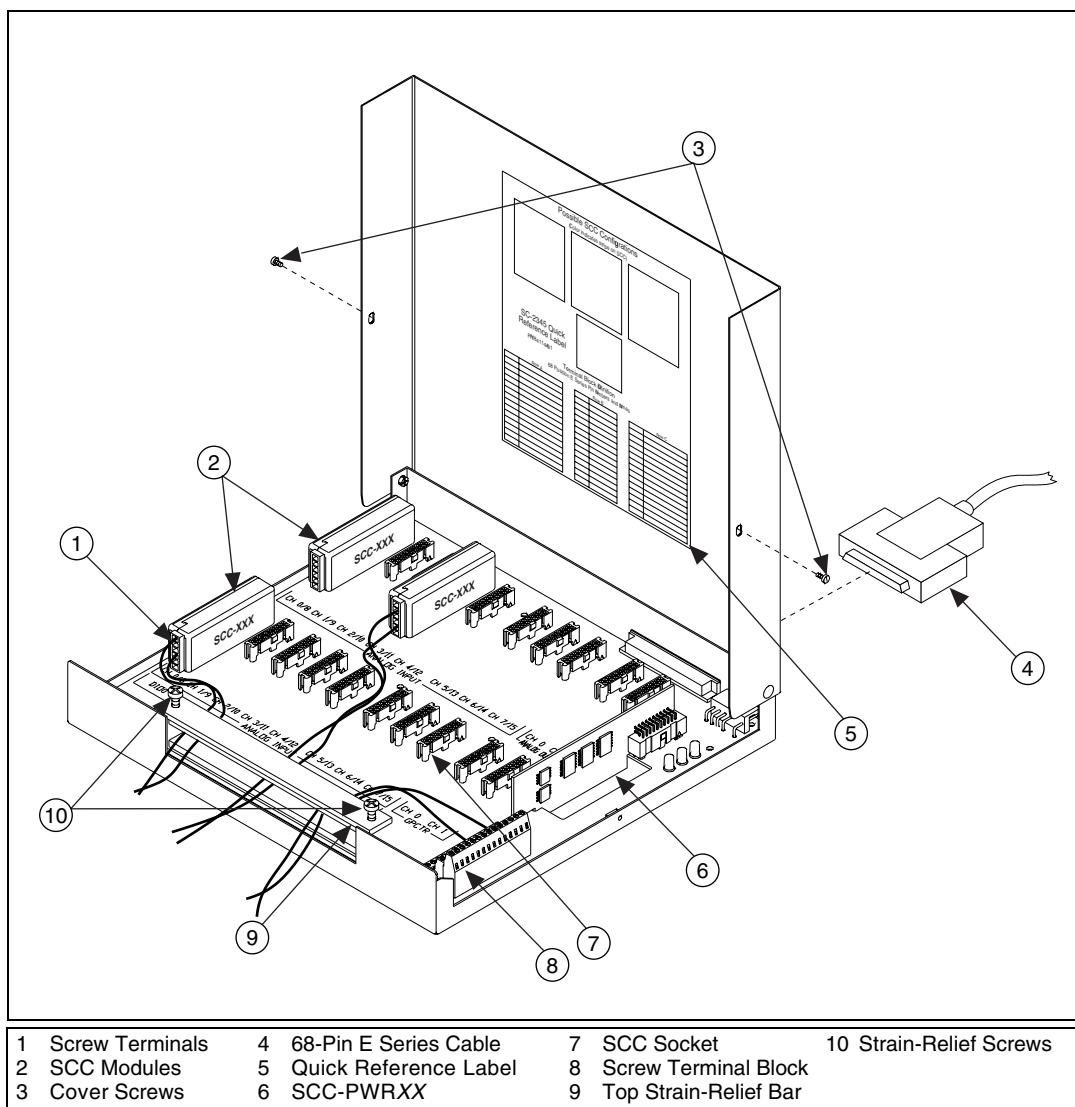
SC-2345 Connector Block Module Assembly Parts Locator Diagram
